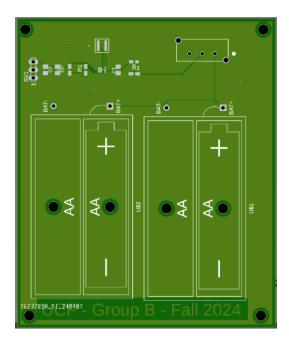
Manufactured Custom PCB (First Revision)
